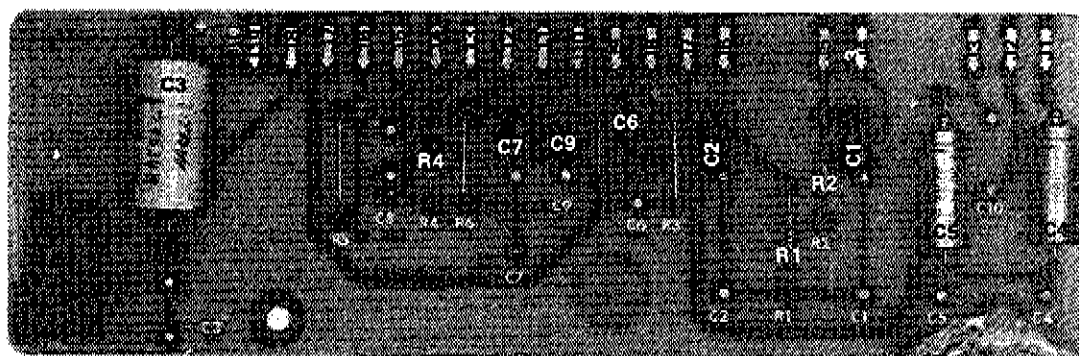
PCB ASSEMBLY, 100 kHz (-09 Option)
